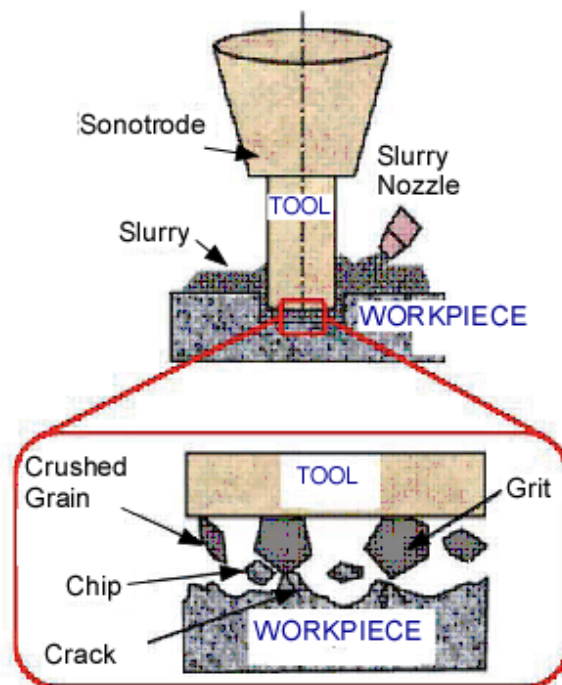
The principle of ultrasonic machining, [Raj06]
